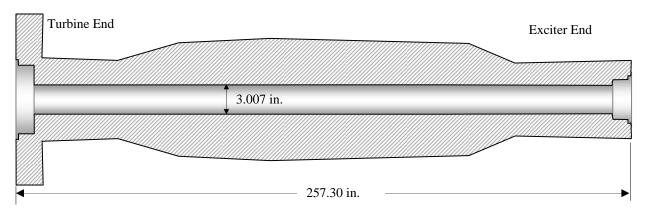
Sketch of JEA NSCT5 generator rotor bore configuration and dimensions (not to scale).
